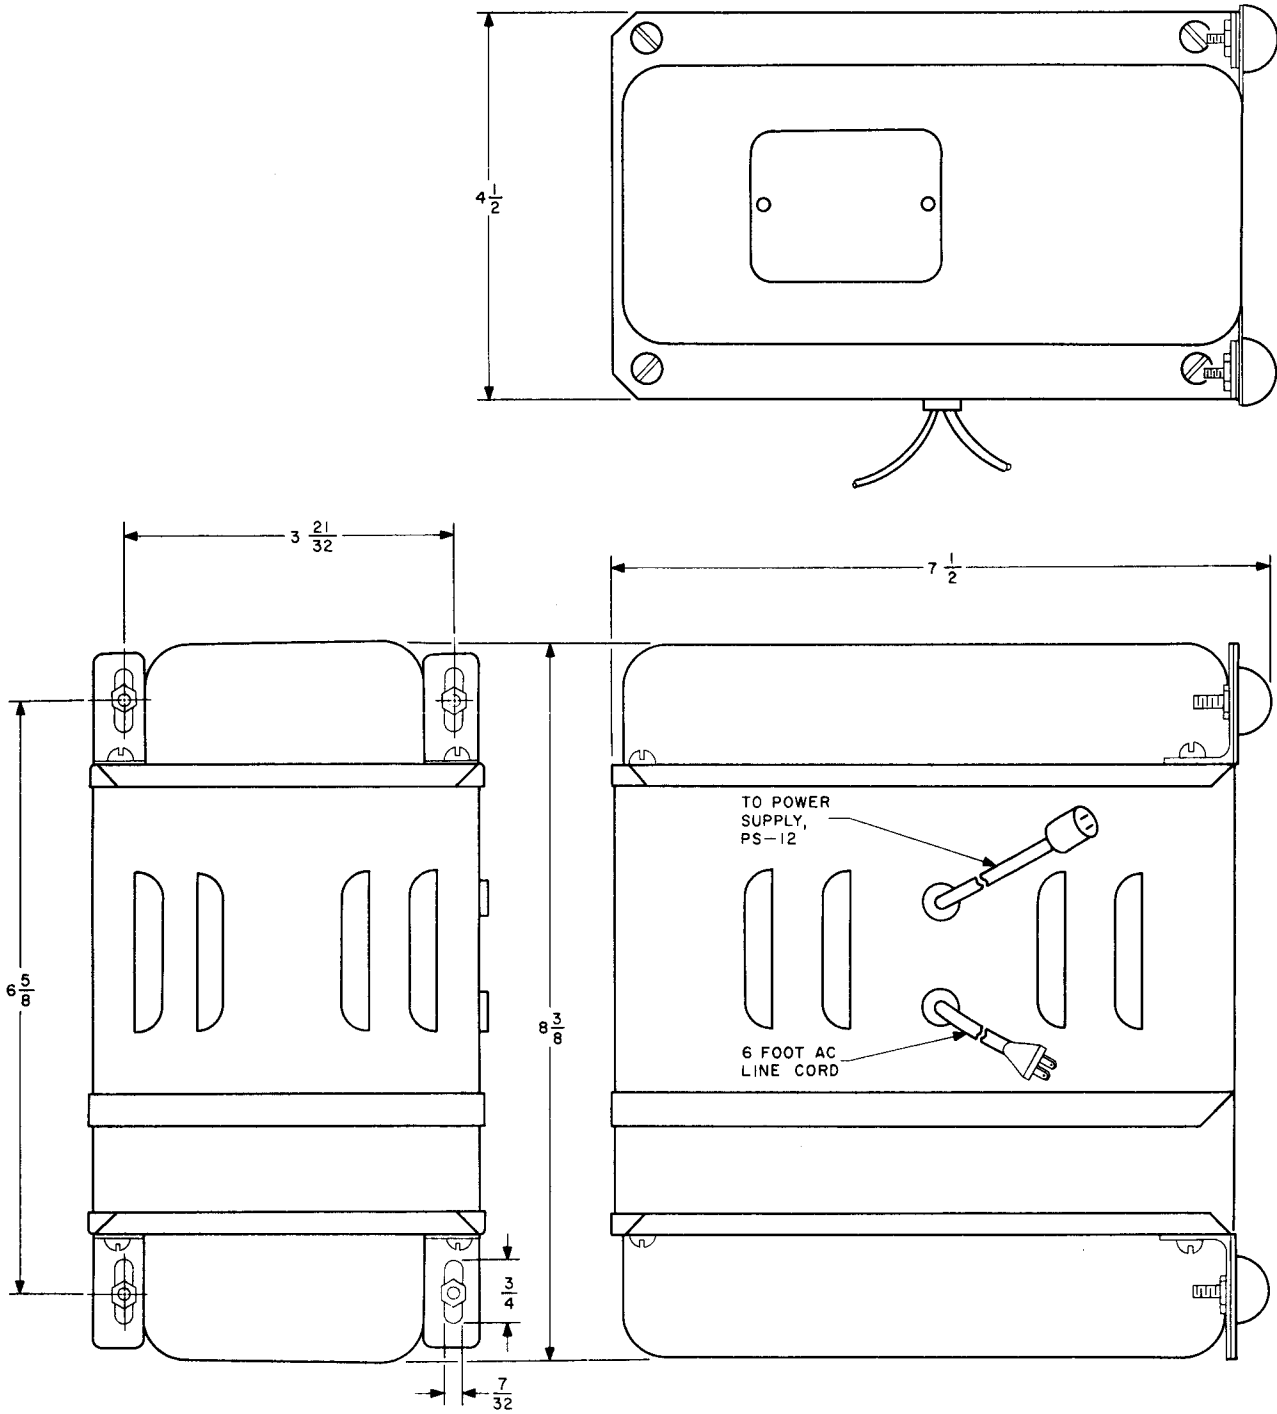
Outline Dimensional Drawing, T3003-1, Part of FSA
